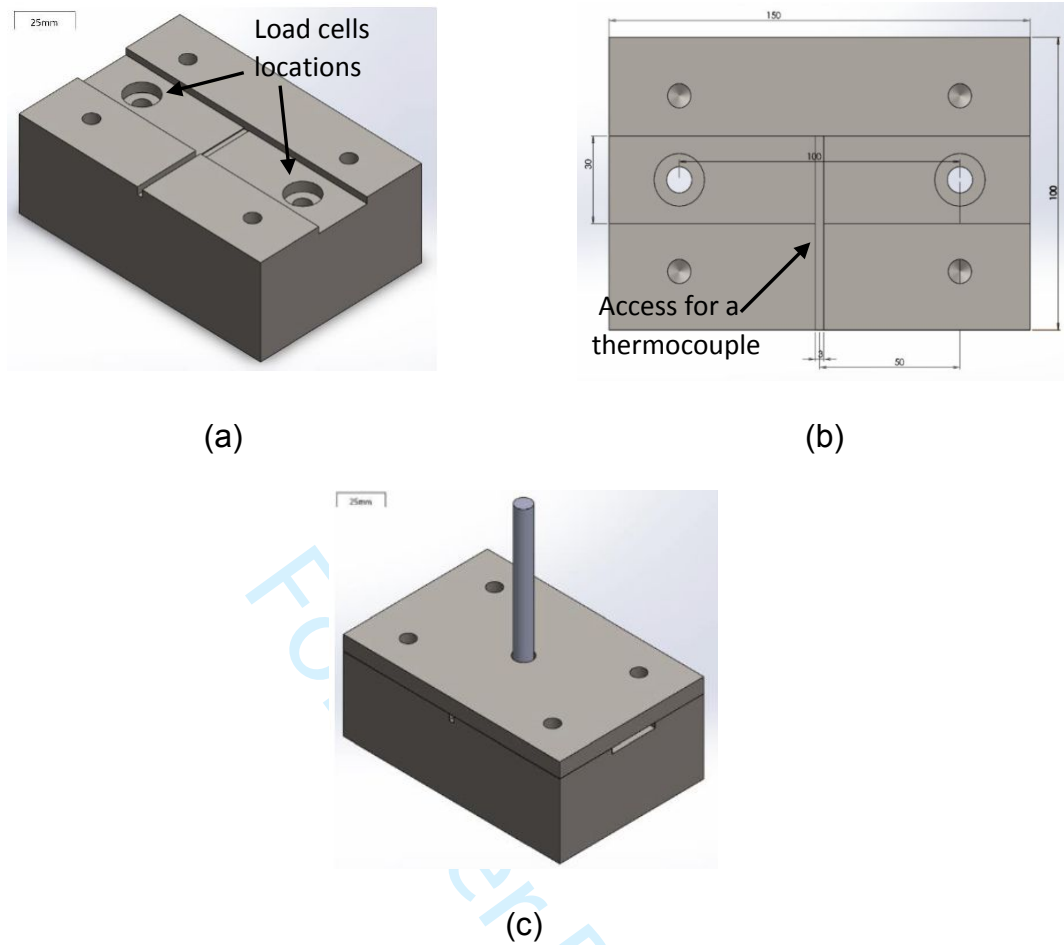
Schematics of jig design with key dimensions. (a) jig base, 50 mm deep, (b) plan view of the base showing all threaded fixing holes and key dimensions in millimetres, (c) assembled base and lid, pin passing through the lid to contact Al.
